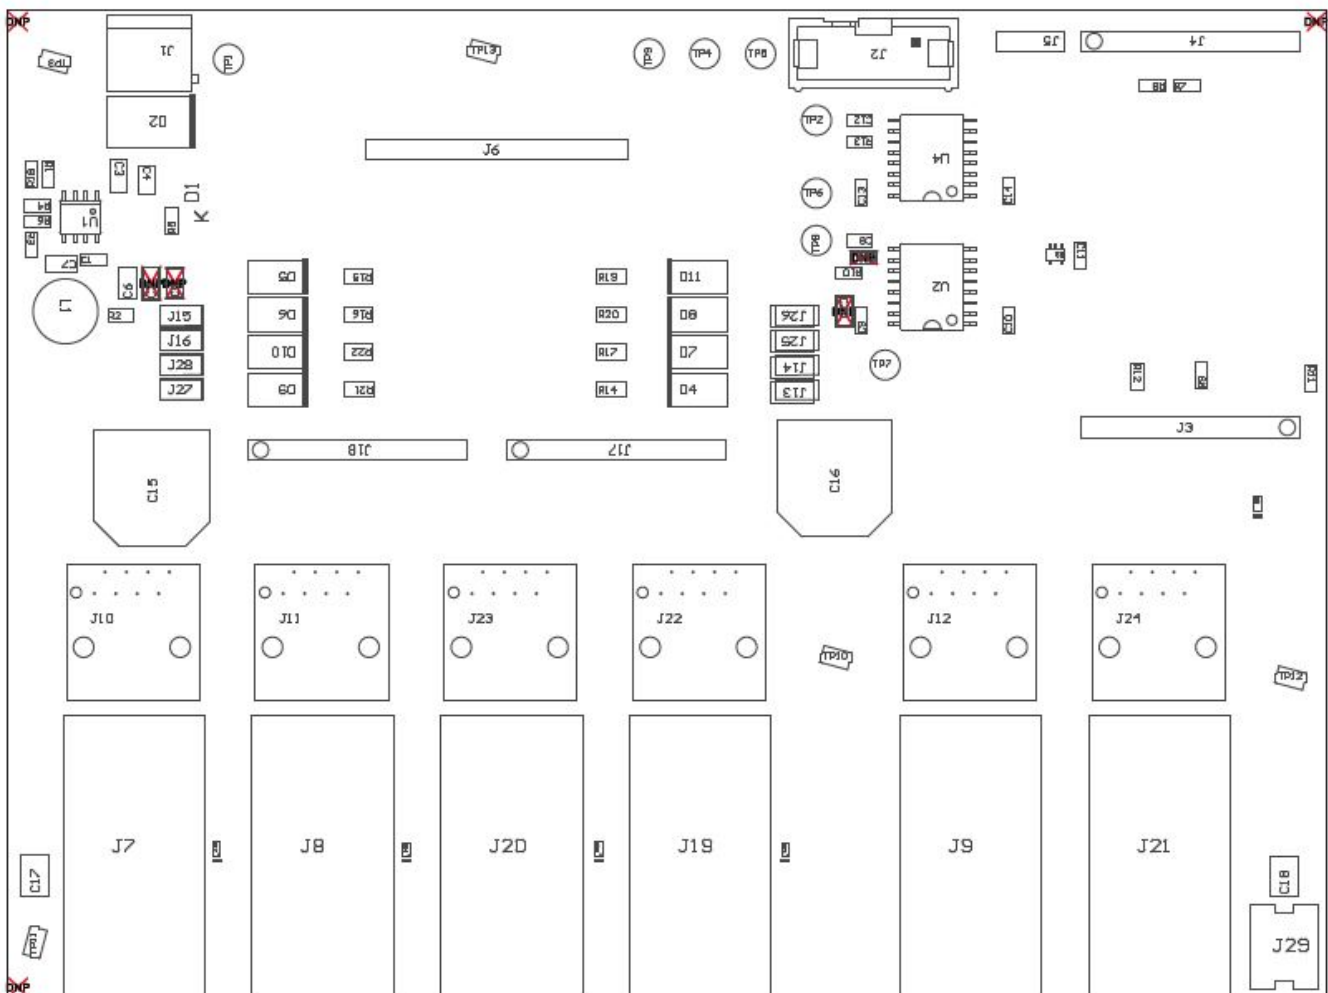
BOOST-PSEMTHR-007 (Motherboard) Top Side Assembly
